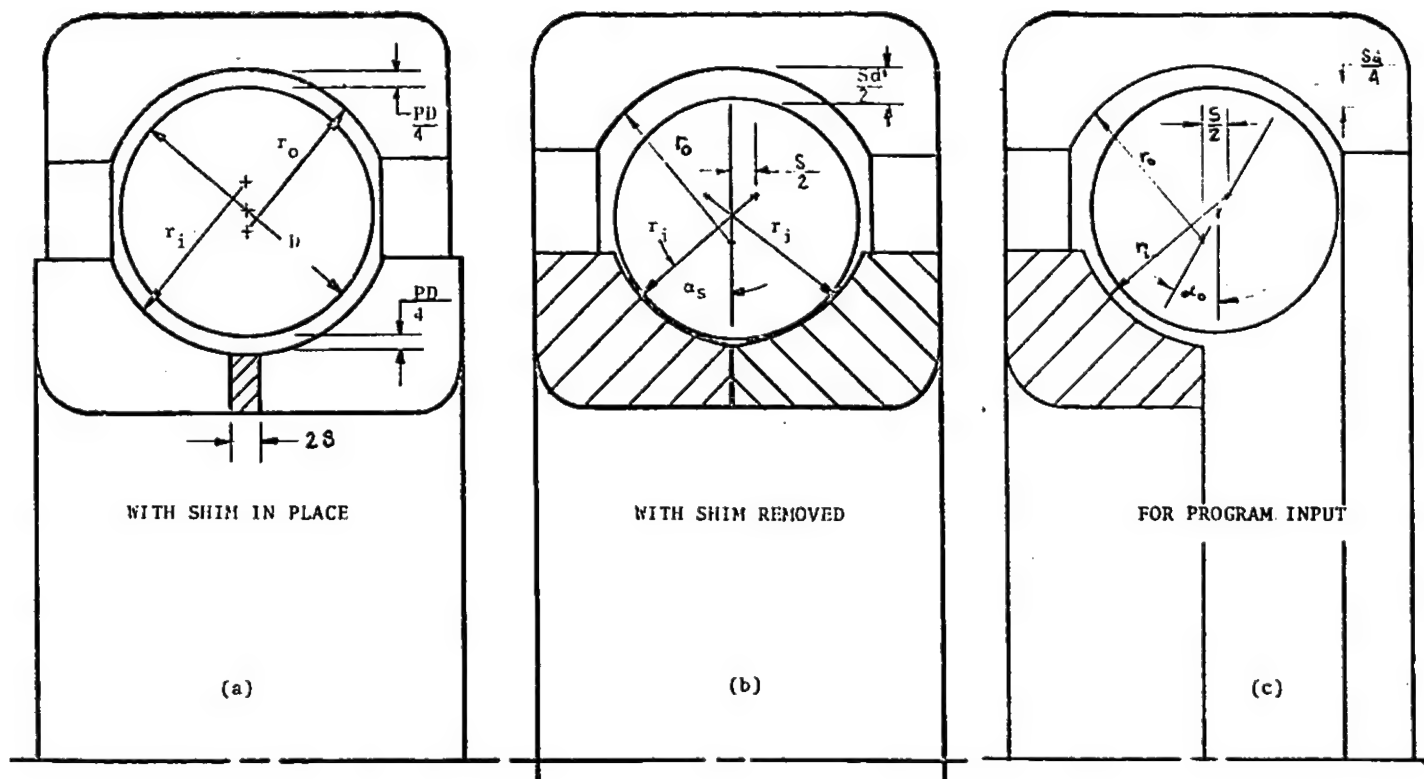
Split Inner Ring Ball Bearing Geometry
